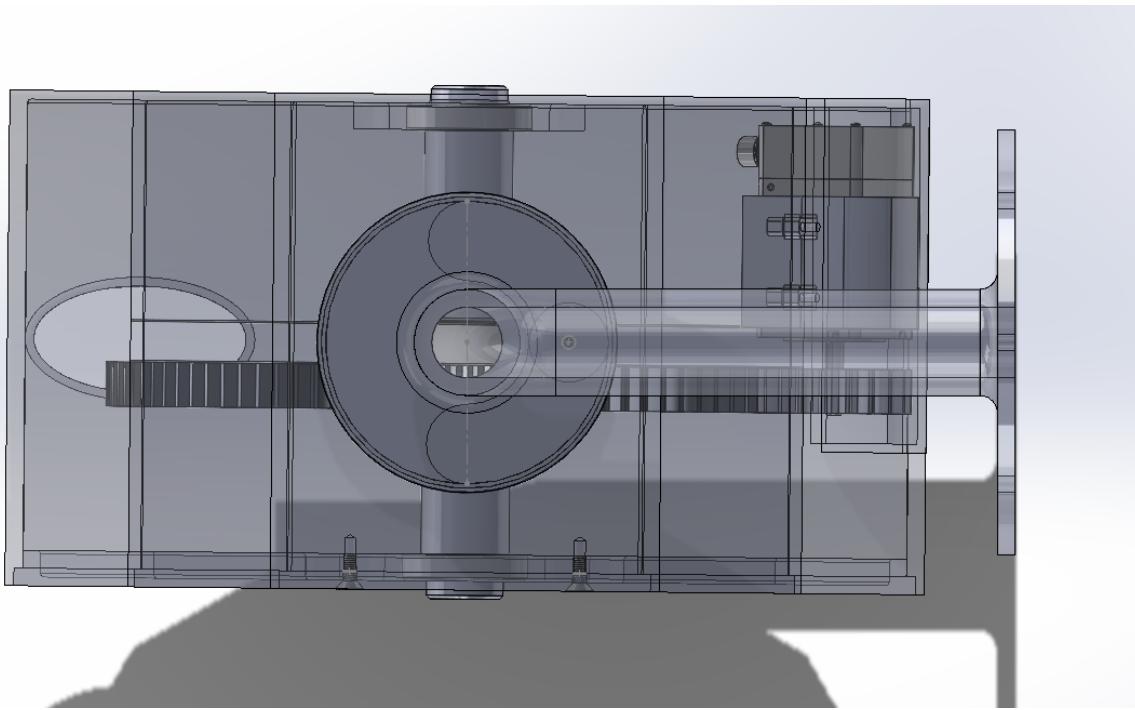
, Bottom View of Swivel Locking Mechanism with Arm.
